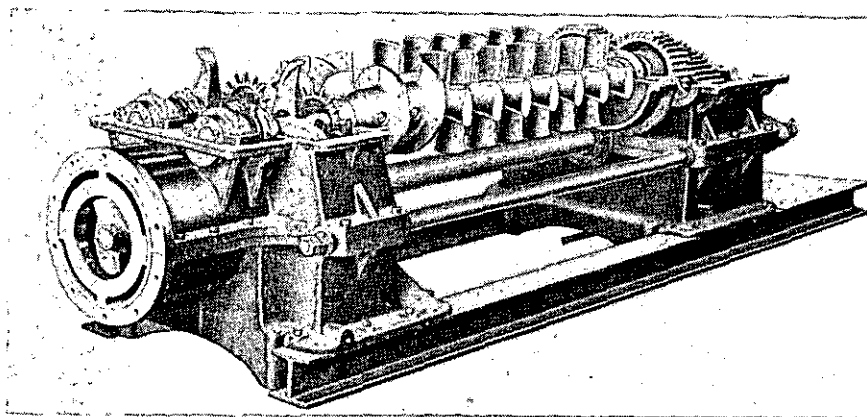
Pug mill with exterior shell removed to reveal pugging assembly (courtesy Fate-Root-Heath Co.). See also Figure 4.1(a).
